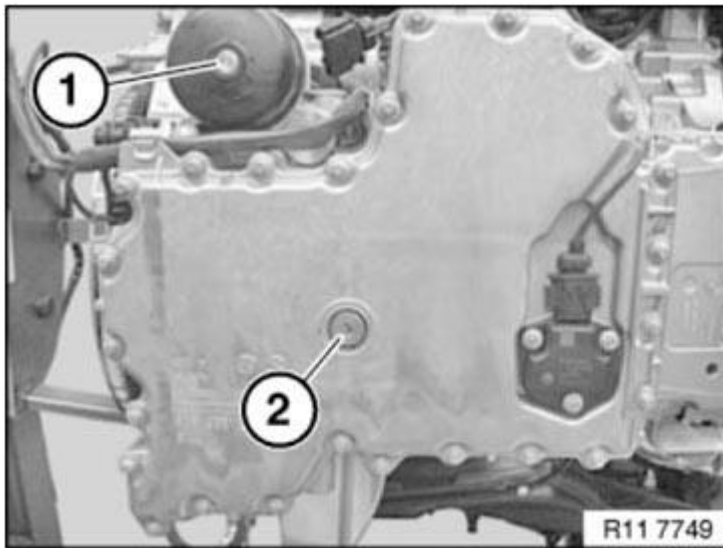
Identifying Screw Plug Of Oil Filter Cap And Oil Sump
